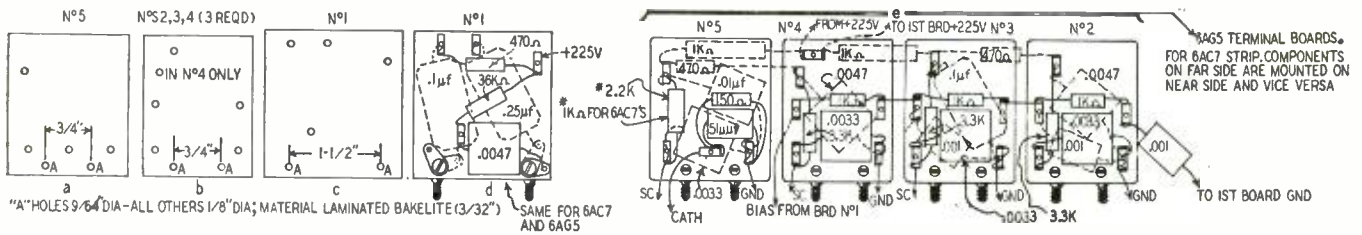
Terminal boards are cut and drilled as shown. This method of construction makes trouble shooting easy.
